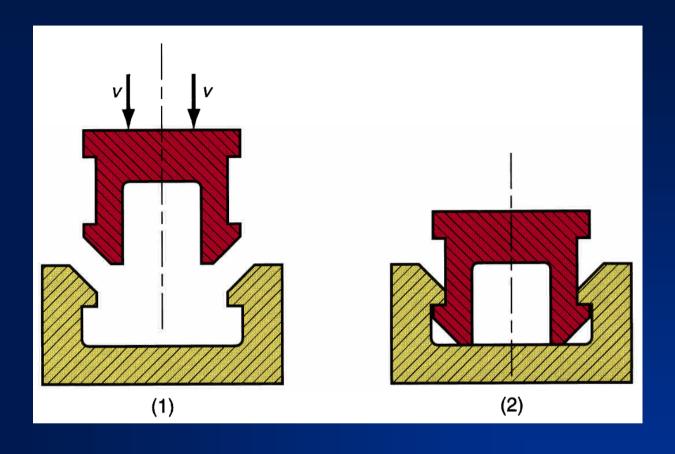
Snap fit assembly, showing cross-sections of two mating parts: (1) before assembly, and (2) parts snapped together
